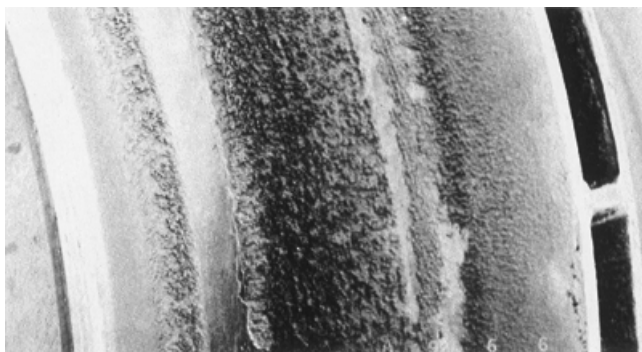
Centrifugal compressor impeller, showing fouling deposits. (*Turbomachinery International, Norwalk, Conn.*)
